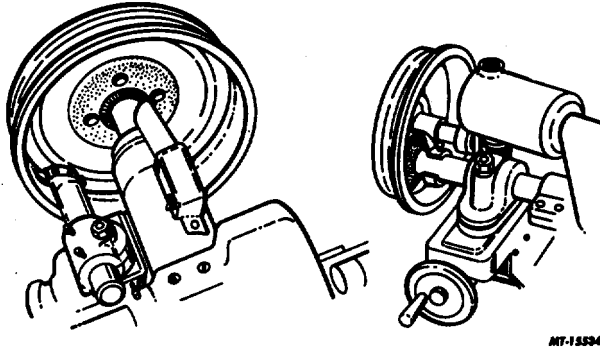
Reconditioning Drum on Brake Drum Lathe
